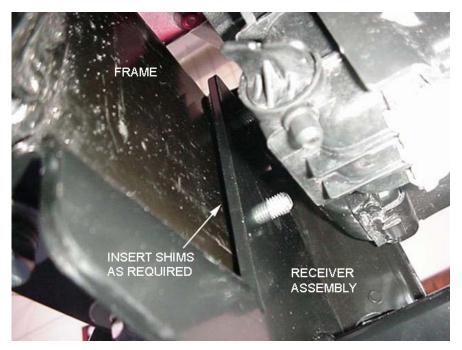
Insert Shims between Receiver Assembly and bumper bracket
